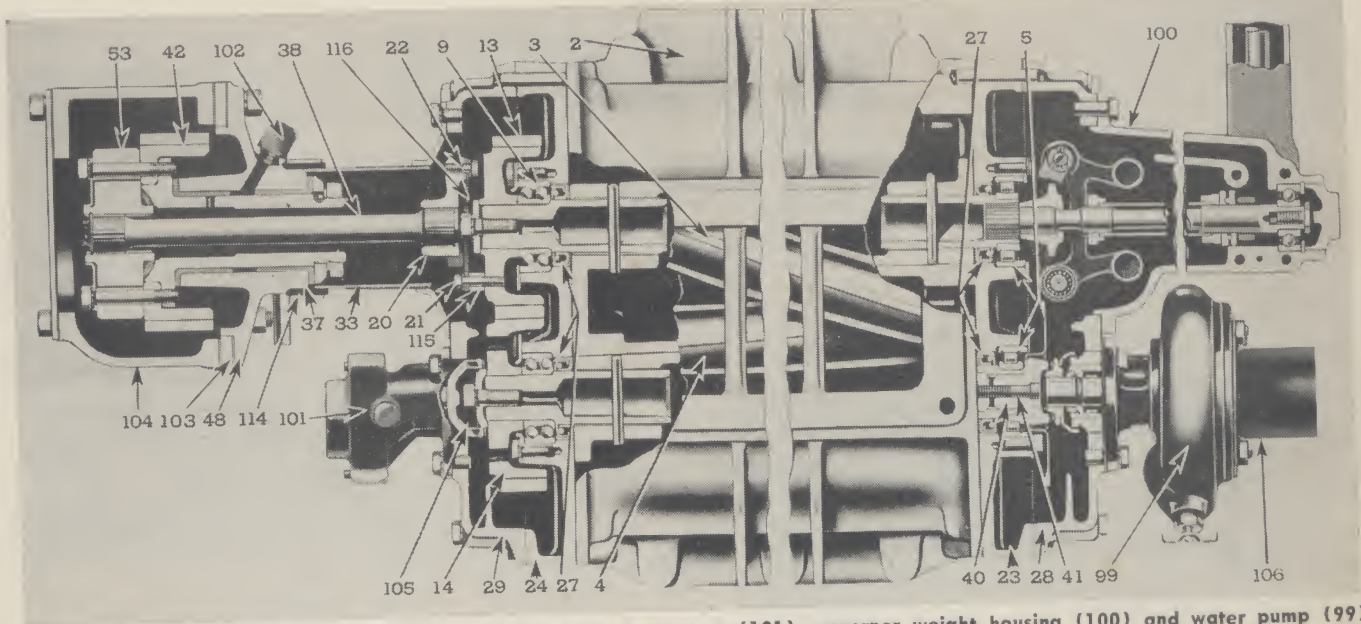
A—GM engine blower and drive assembly with fuel pump (101), governor weight housing (100) and water pump (99) attached to blower.
